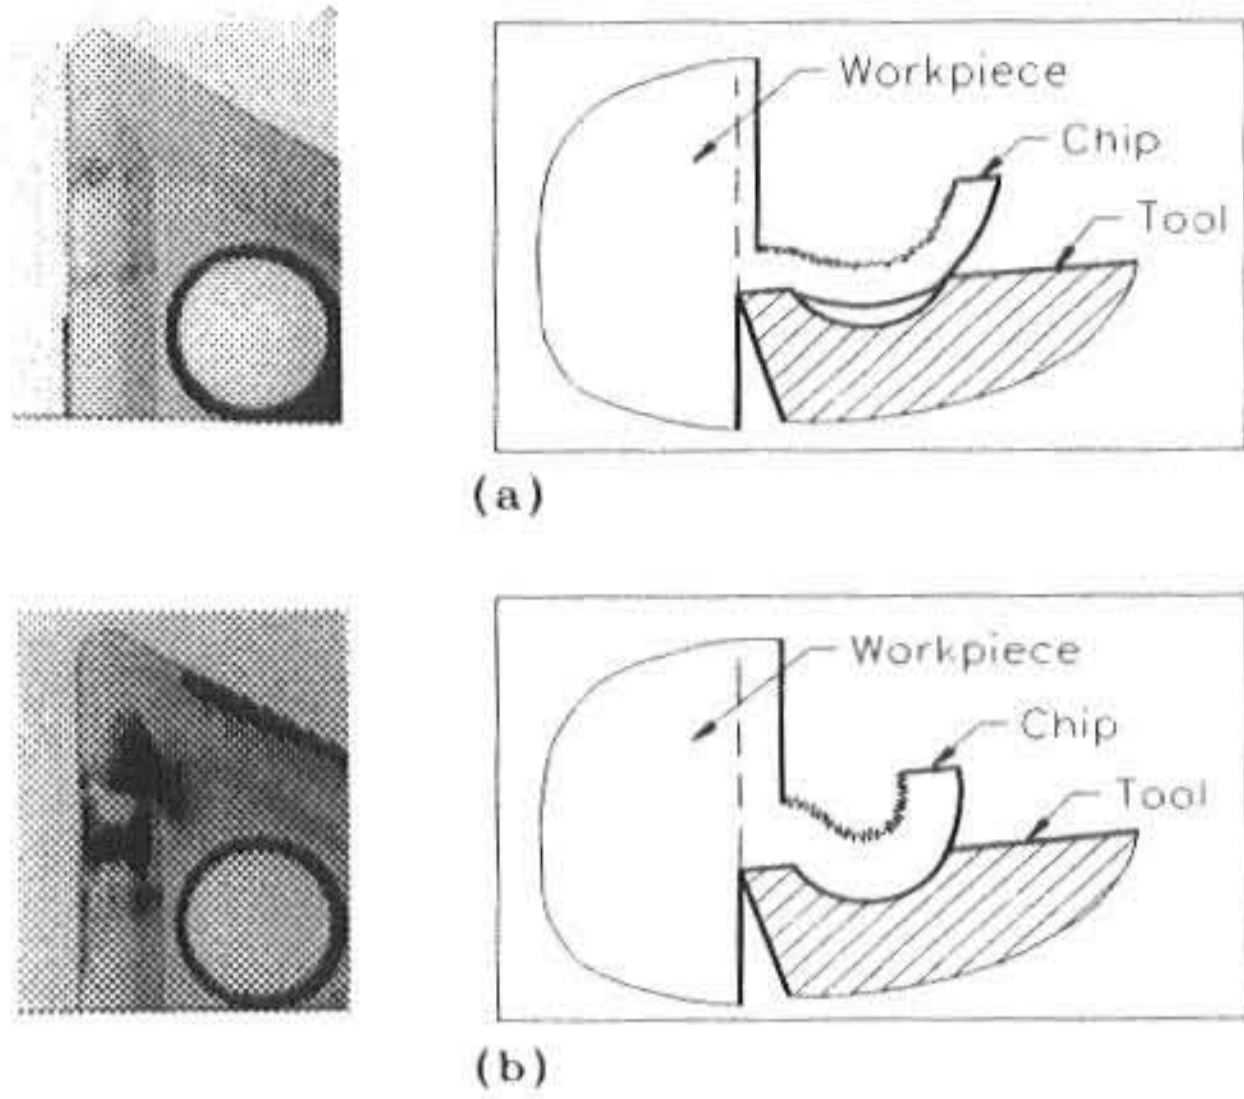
Photographs showing vestige of chip tool contact of the groove type insert. (feed rate ; (a) 0.13mm/rev, (b) 0.25mm/rev)
